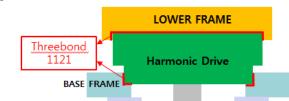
S-axis reduction gear Three Bond coating detail [HH007C]
